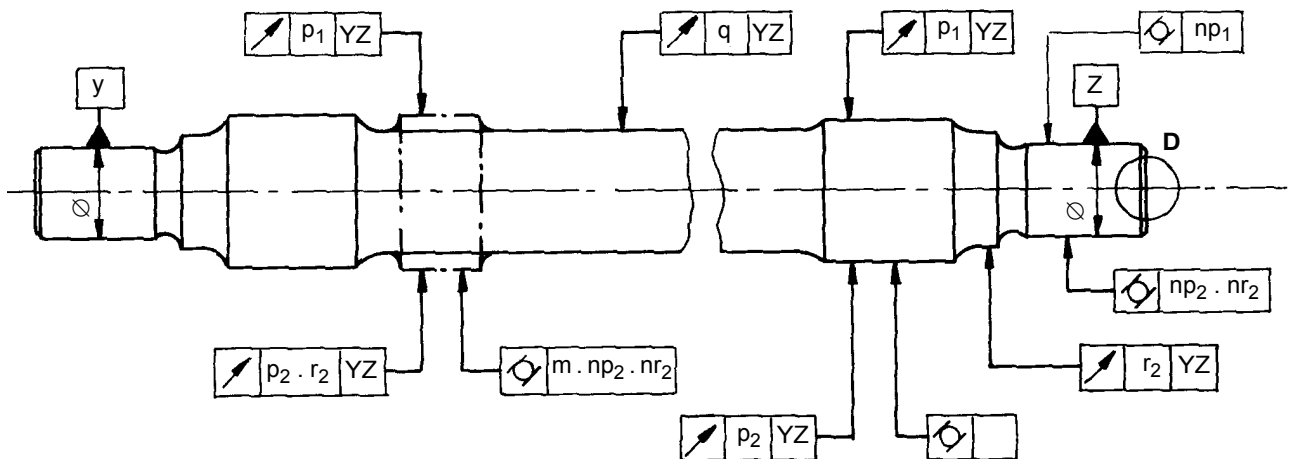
Geometrical tolerances relative to reference line YZ of "finish-machined" axles and "ready-to-assemble" axles
